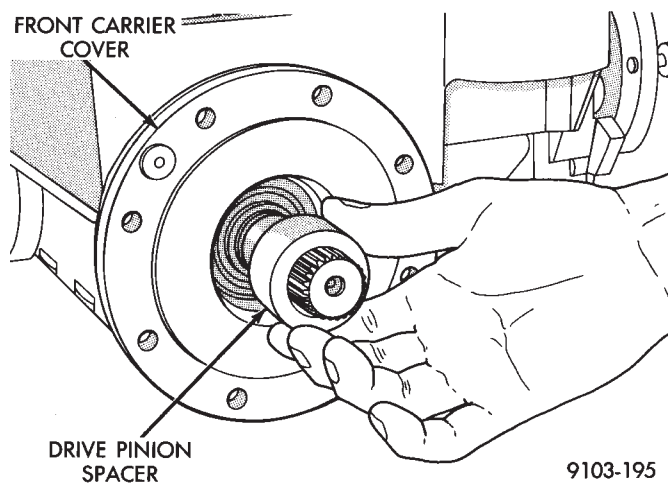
Installing Drive Pinion Spacer onto Pinion
